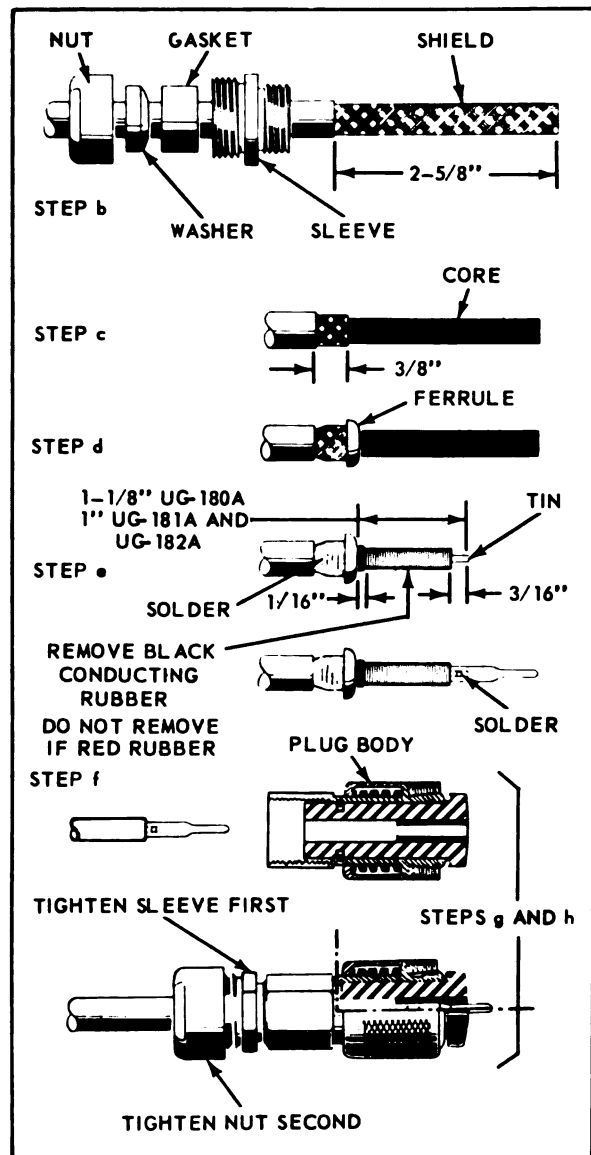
Assembly of Rubber Insert Pulse Connector
